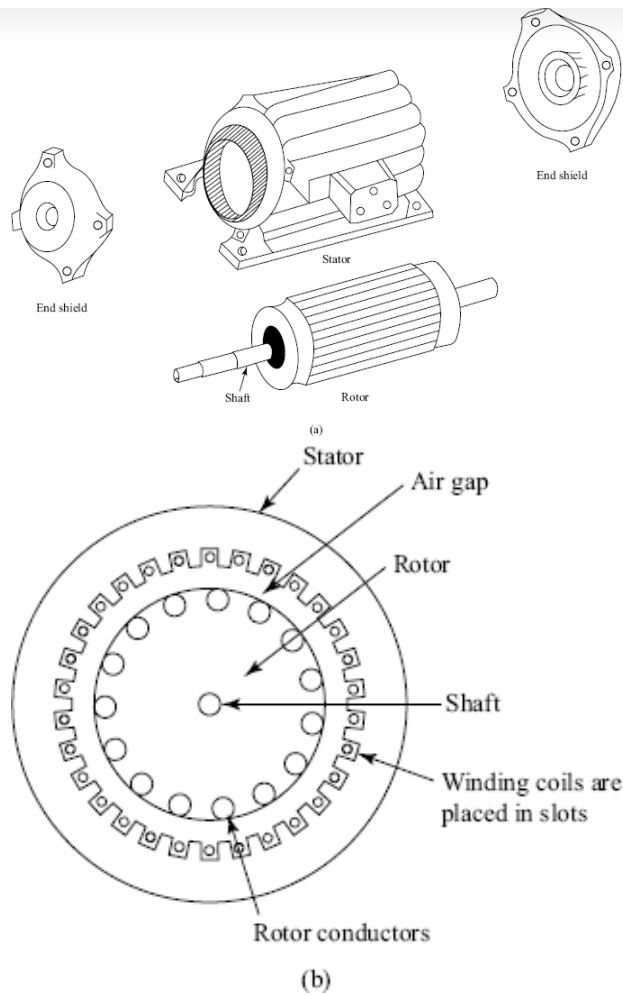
Constructional details of a three-phase induction motor: (a) stator, rotor, and end shields in isometric view; (b) cross-sectional view of stator and rotor
